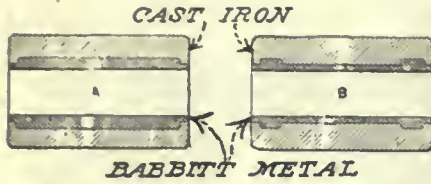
A—TWO METHODS OF BABBITTING A BEARING.
